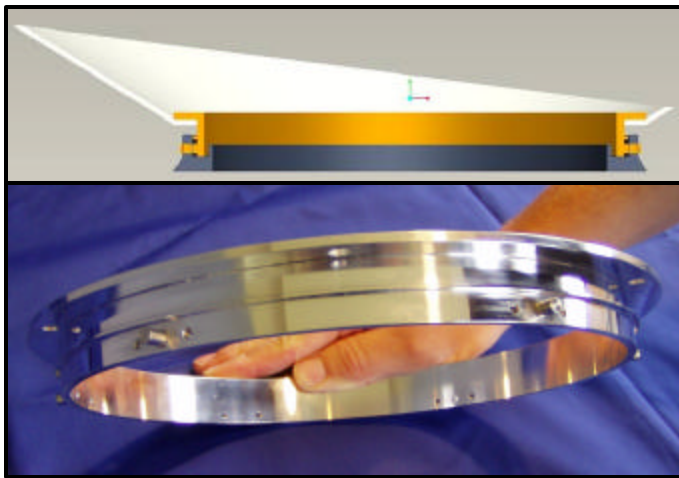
Helmet Attachment Ring CAD Model and Final Part
